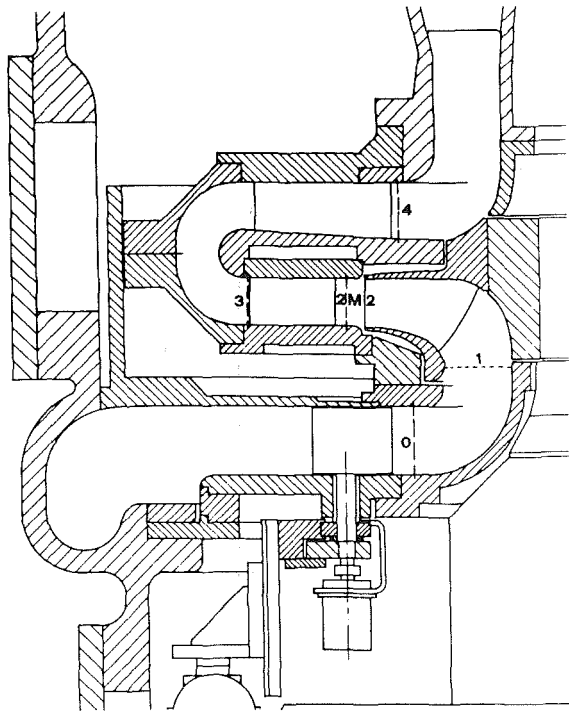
Typical radial stage and measuring planes in the test stand: measuring planes: 0=inlet; 2M=diffuser inlet; 3=diffuser outlet; 4=stage outlet; calculating planes: 1=impeller inlet; 2=impeller outlet
